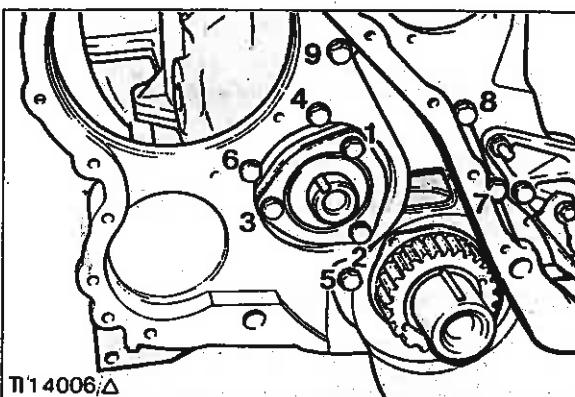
Timing Gear Housing Bolt Tightening Sequence - 2728T Engines
